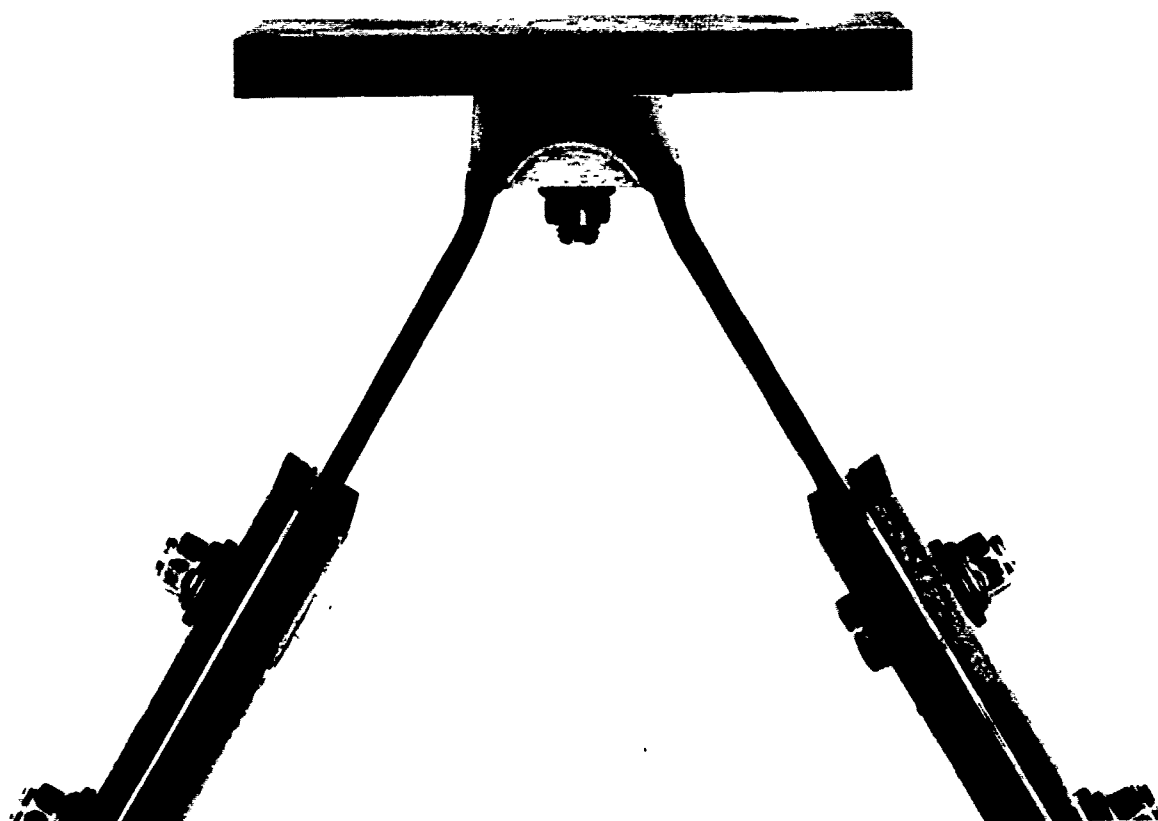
Z3568686-501 BOLTED JOINT TENSION SPECIMEN
